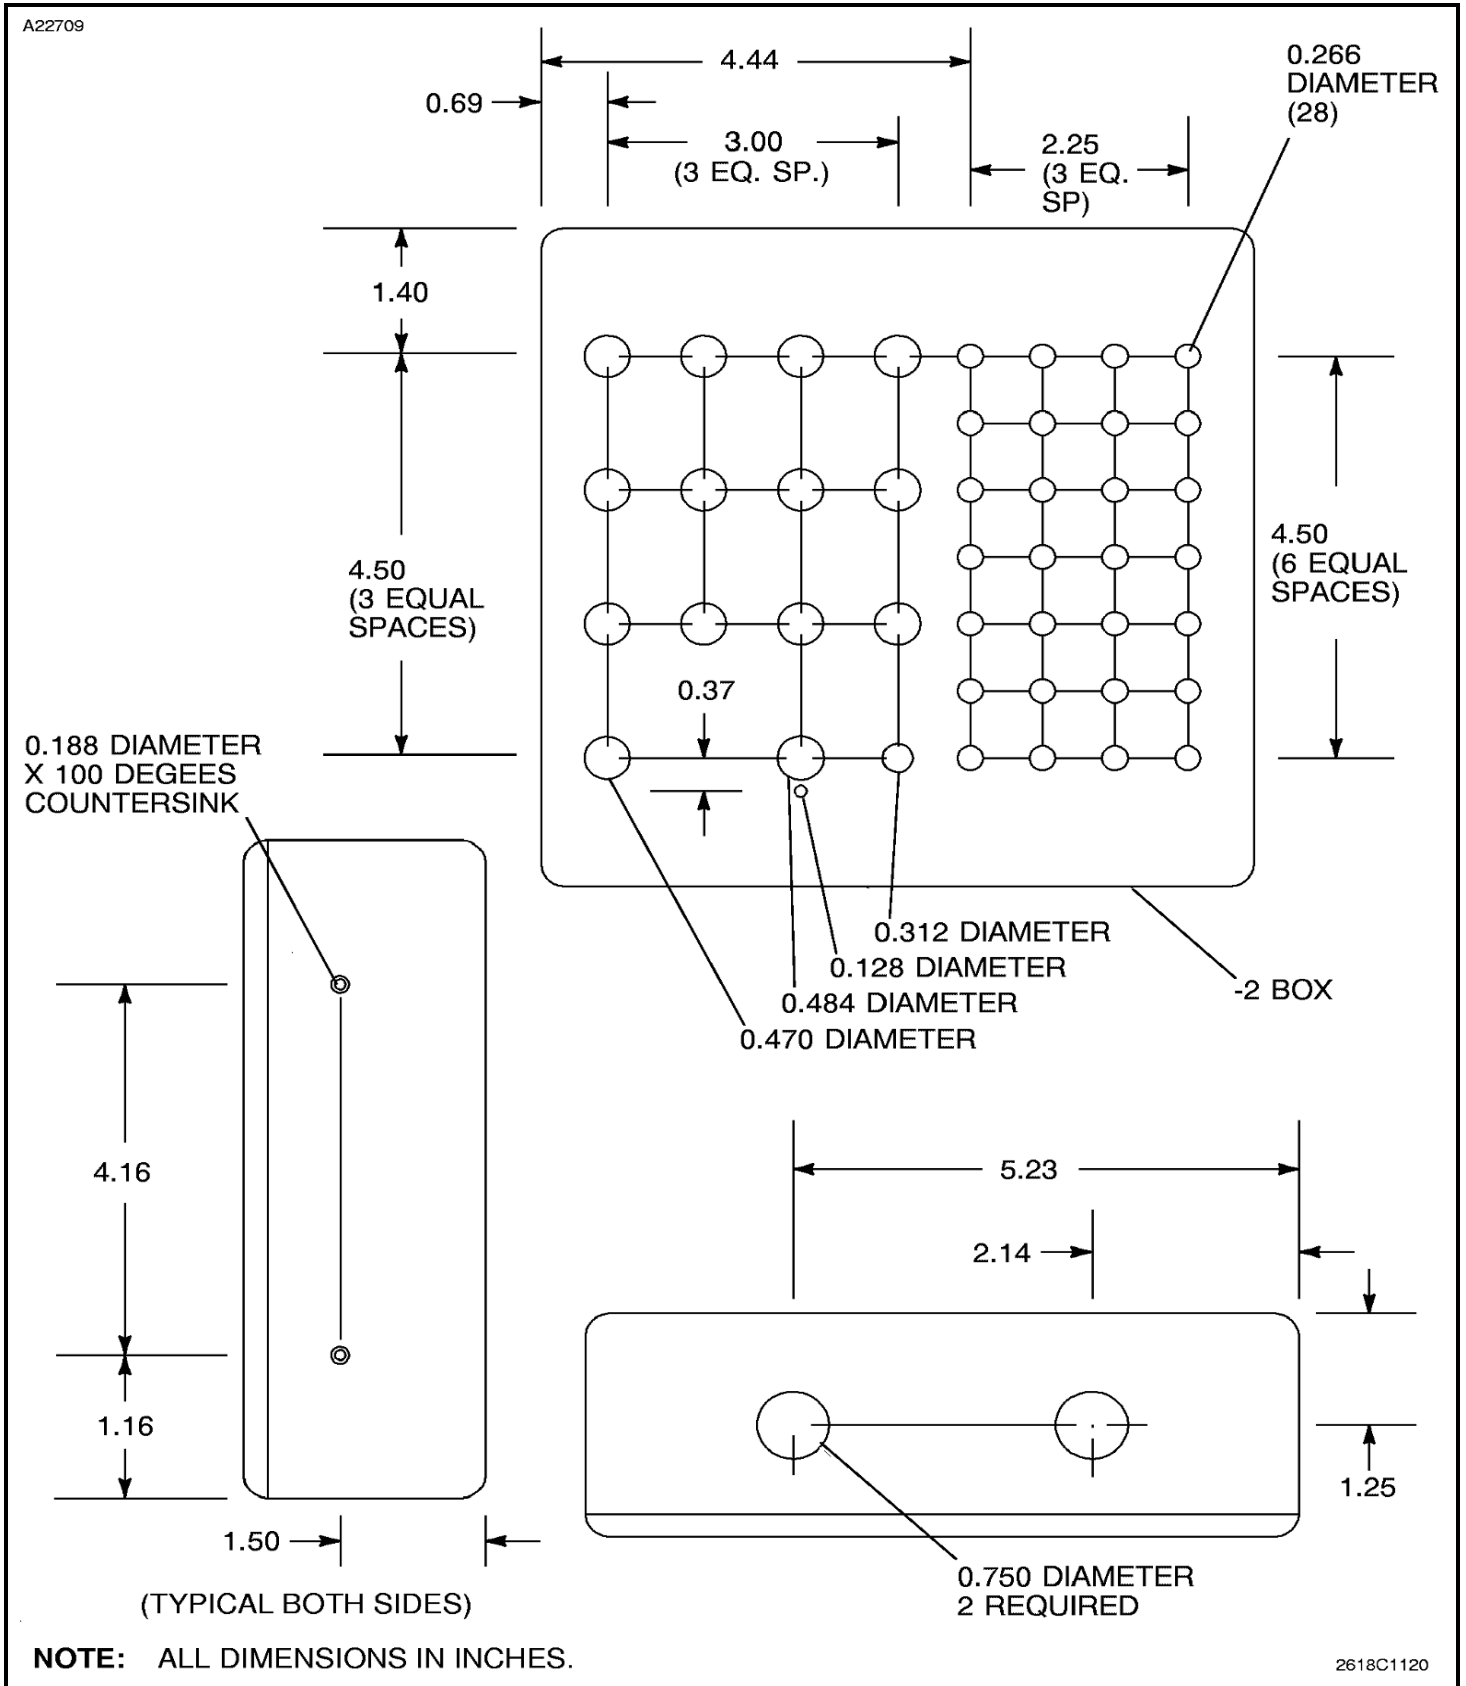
Sheet 4 : GCU Test Box Fabrication
